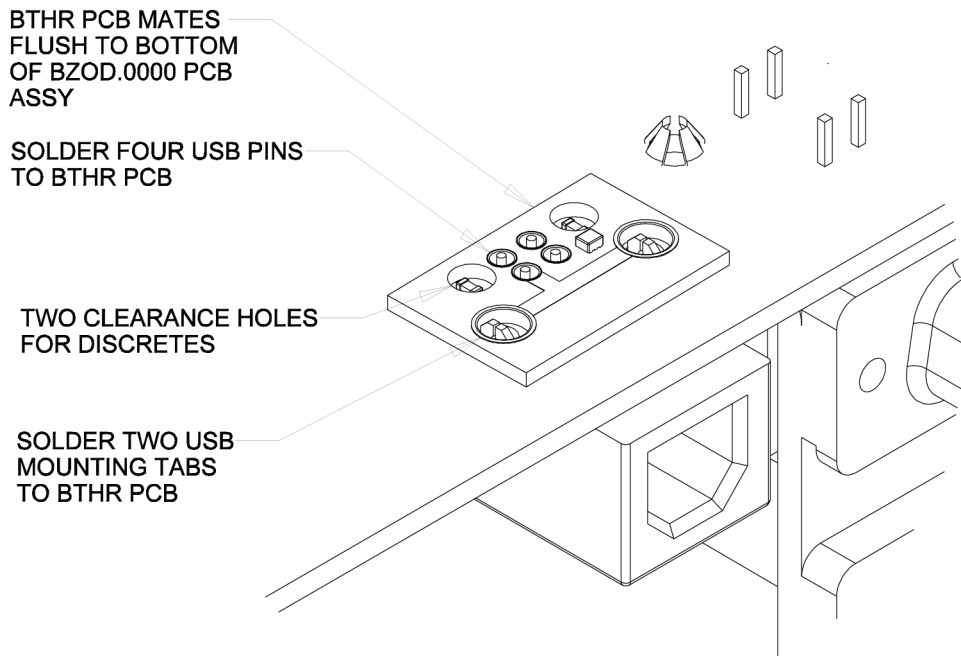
Soldering of BTHR module to BZOD PCB assy.
